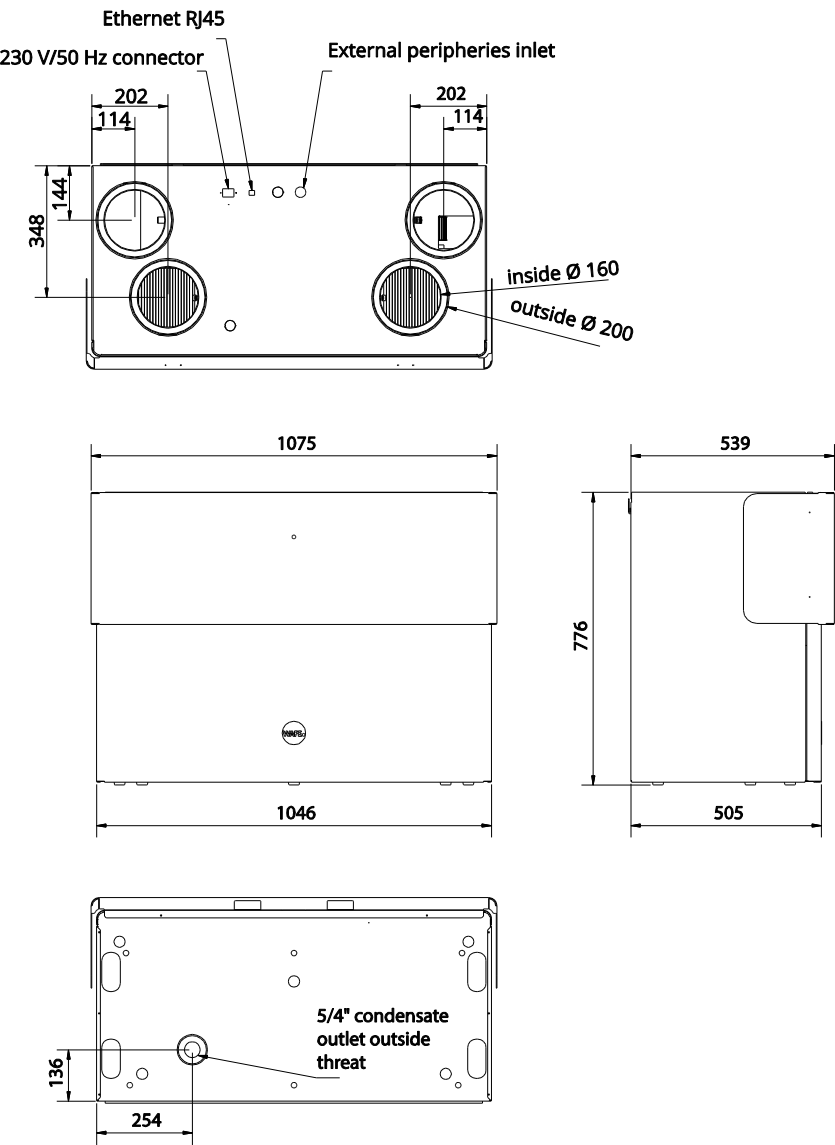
Technical drawing of the unit with decorative pull-out cover.
